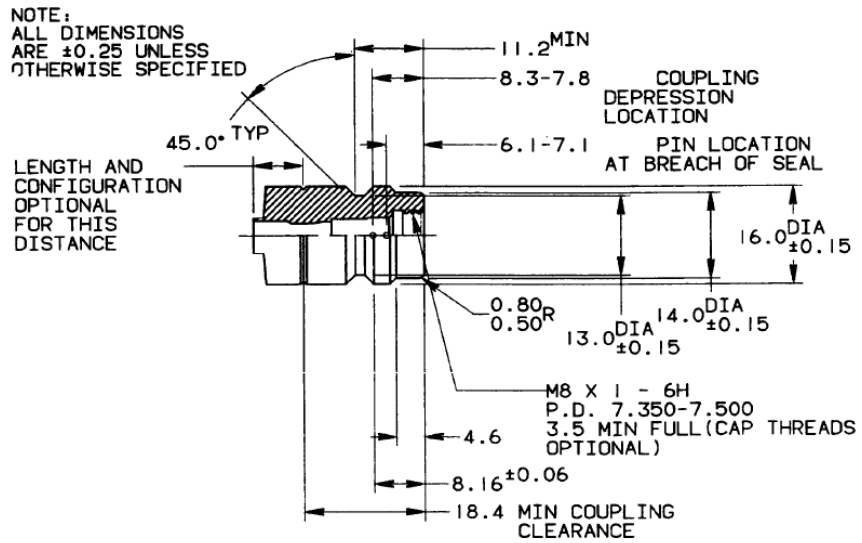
A - R-134a HIGH SIDE SERVICE FITTING (DIMENSIONS ARE METRIC)
